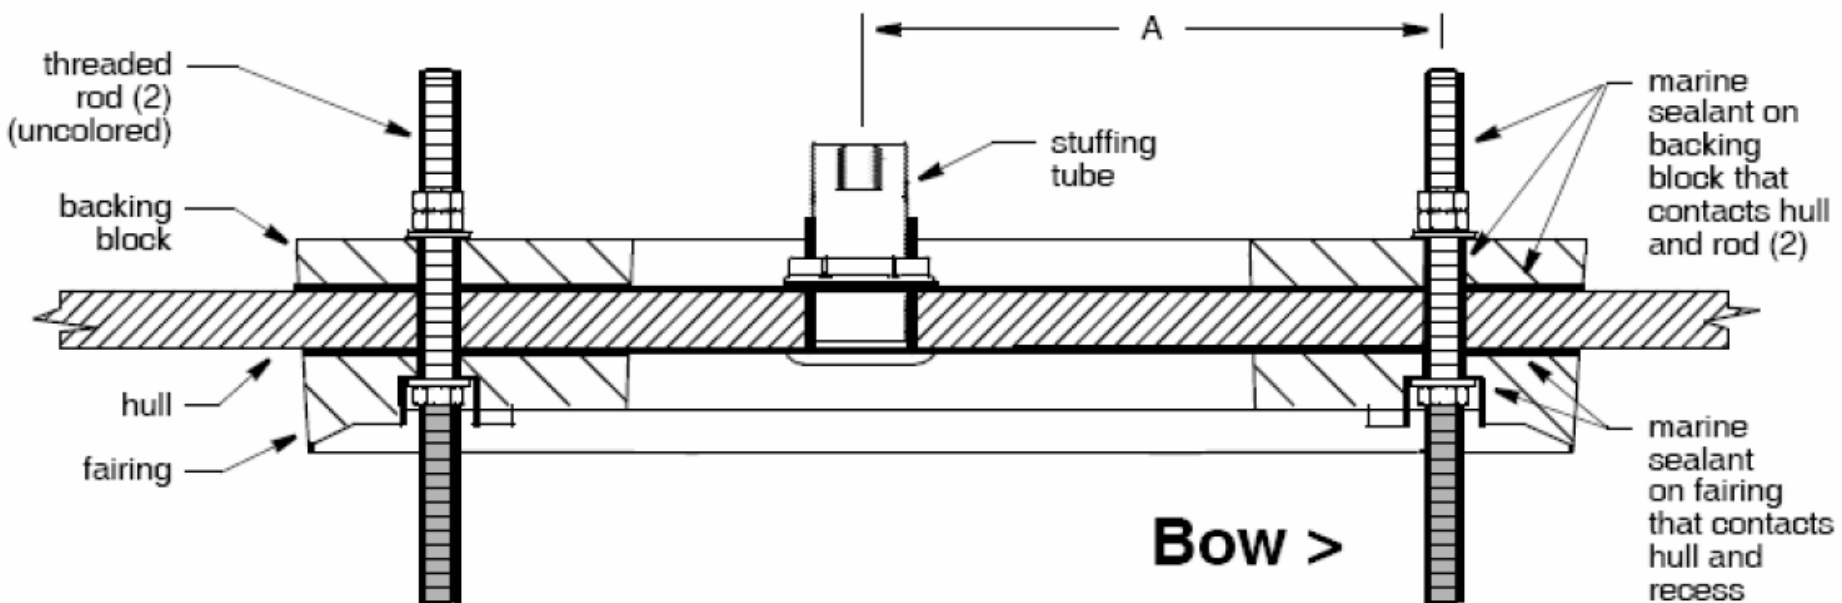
Bedding and installing the fairing and backing block (non-metal hull shown)
